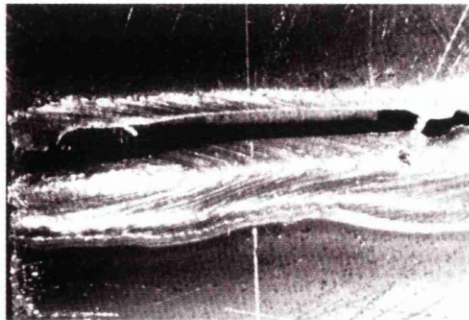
Typical Weld Toe Failure of GM2 under R-Ratios of $R=0.5$
